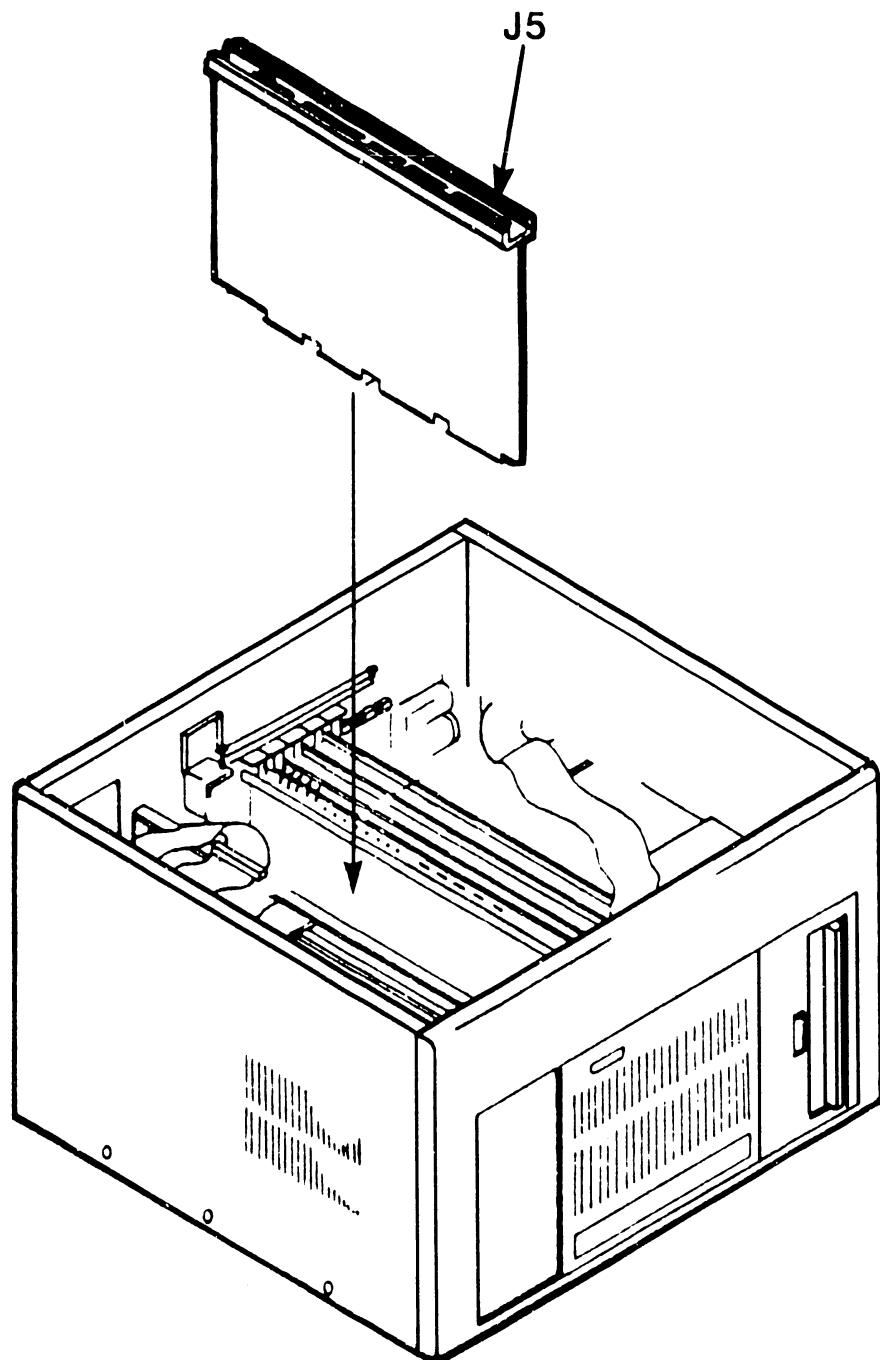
TC Controller Installation into 105/115/125A/130A Master
